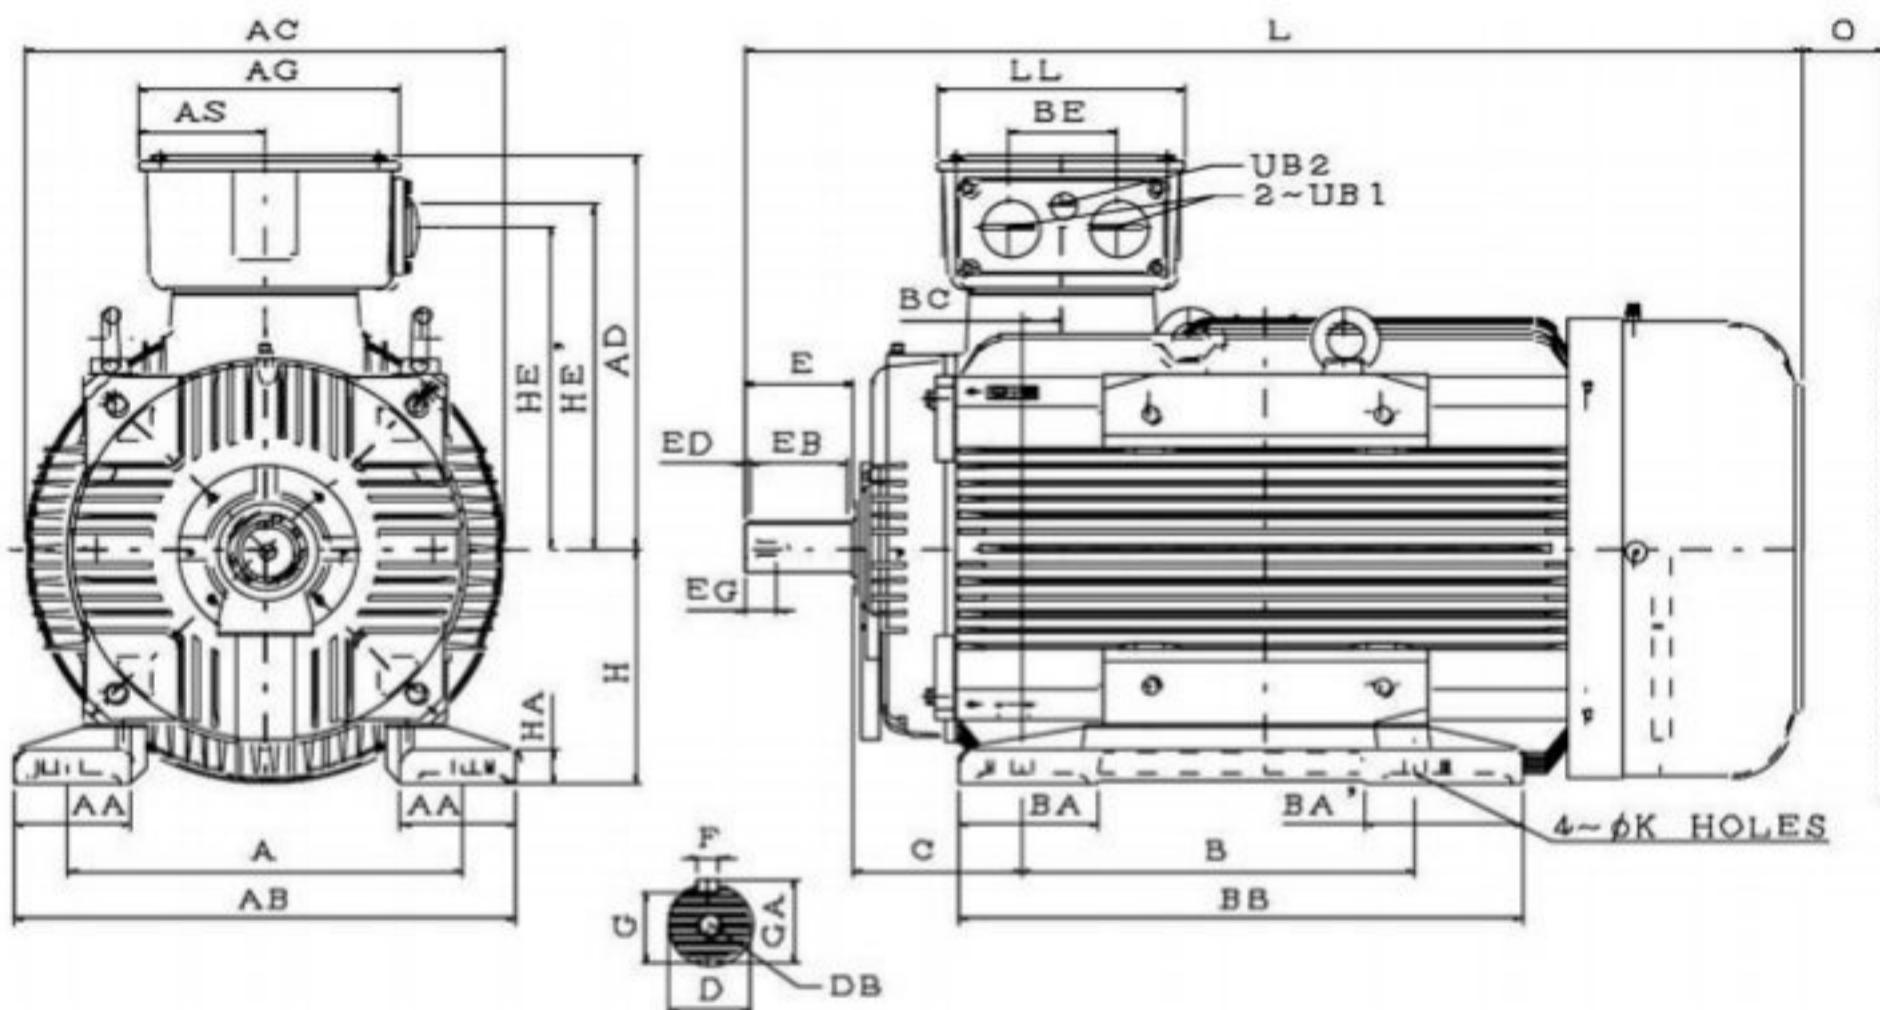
Outline drawing of cast iron design, feet version, mounting B3; frame size 315L
